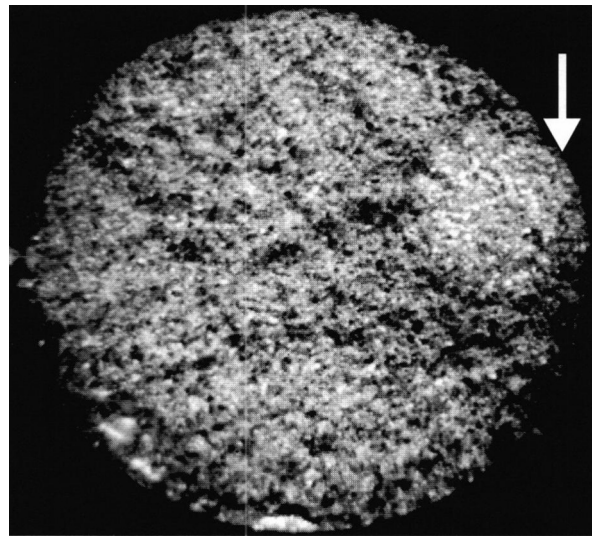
Fracture surface of a tensile test specimen. The arrow points the location at which the sample was wet. Sample diameter is 6.5mm.
